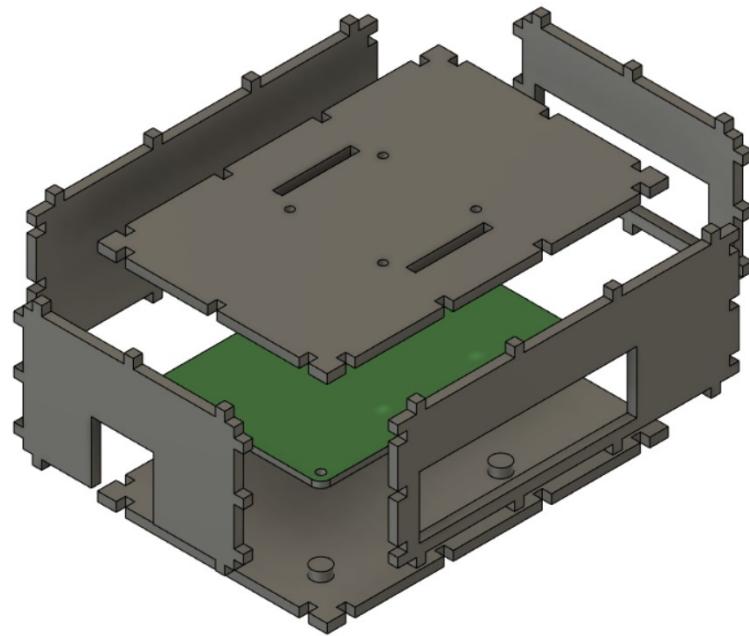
Exploded view of the Raspberry Pi housing unit. The unit includes 6 side walls and a dummy PCB is placed in the model for sizing and reference.
